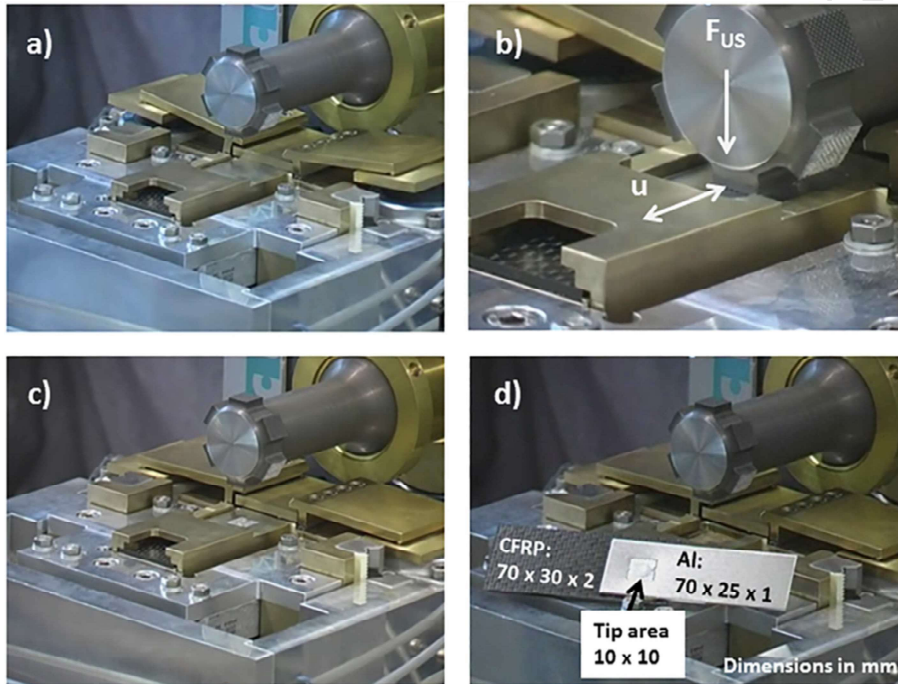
Experimental setup for ultrasonic metal welding: a) composite-aluminum joint loaded in the clamping system; b) sonotrode tip at contact with the aluminum adherend during ultrasonic spot welding; c) raised sonotrode and disabled clamping tools; d) CF/epoxy-AA5754 joint after ultrasonic welding.
